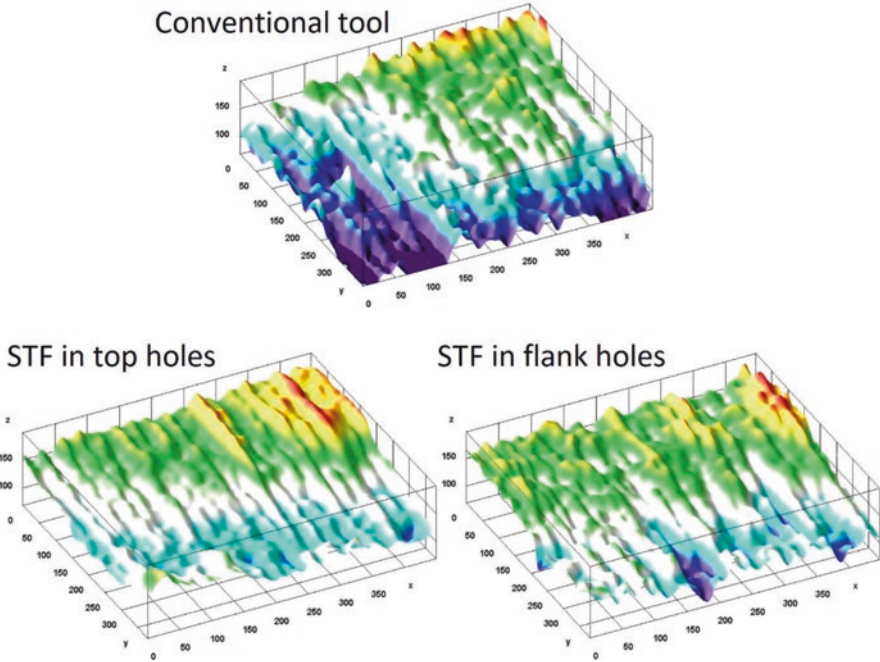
Surface topographies for the workpieces machined with different cutting tools [37]. Reprinted by permission from Elsevier
